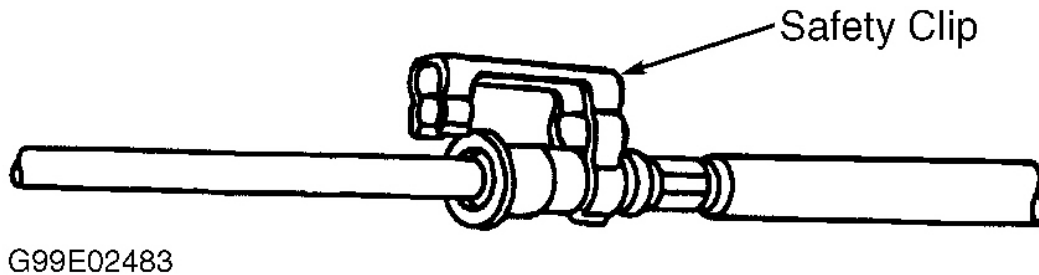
Disconnecting Fuel Lines With Push Connect Coupling
